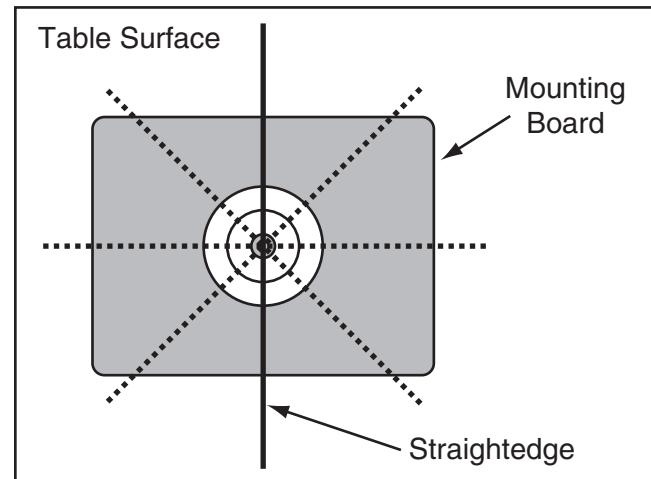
Star pattern for the straightedge when aligning the mounting board with the table.
